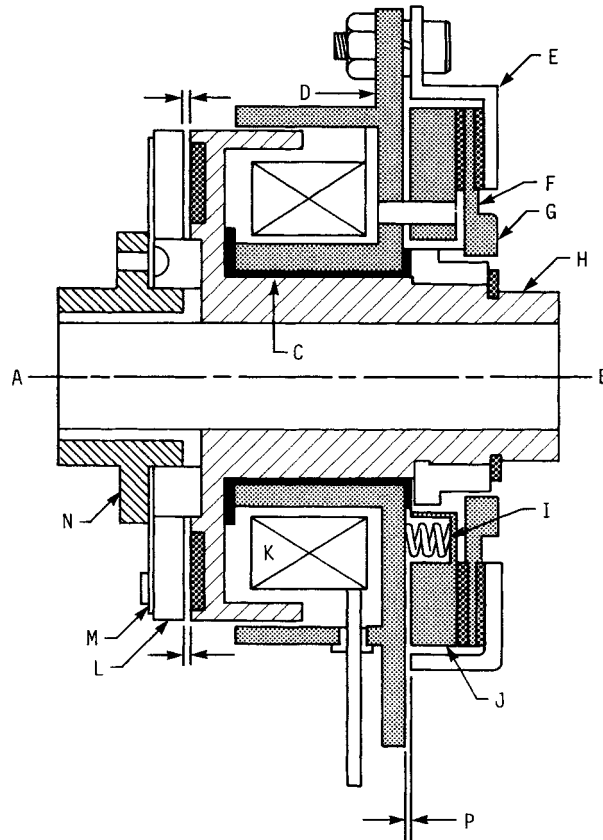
Clutch-brake transmission. *A*, input; *B*, output; *C*, field coil bearing; *D*, field coil assembly; *E*, pressure cup; *F*, brake plate; *G*, hub spring; *H*, rotor assembly; *I*, brake spring; *J*, brake armature; *K*, field coil; *L*, clutch armature; *M*, clutch spring; *N*, drive plate; *P*, air gap. (Electroid Corporation.)
